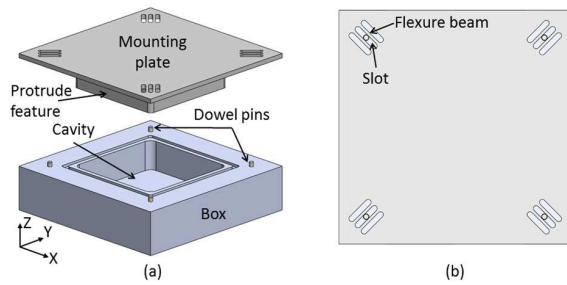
(a) Illustration of a box with a cavity that has a mounting plate to seal the top portion. (b) Top view of the mounting top that has four symmetrical elastic contacts to locate the seal the box with four guiding dowel pins.
